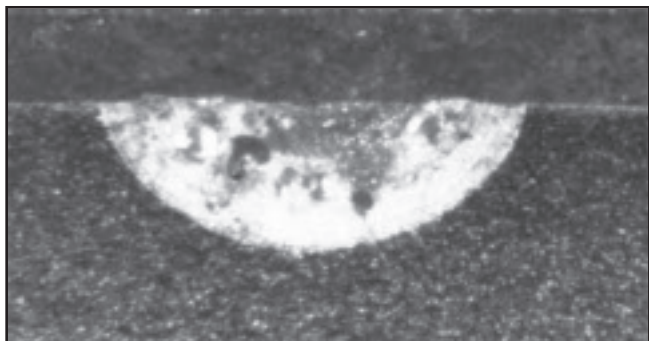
Typical cross section of weld zone used for bead measurements.
